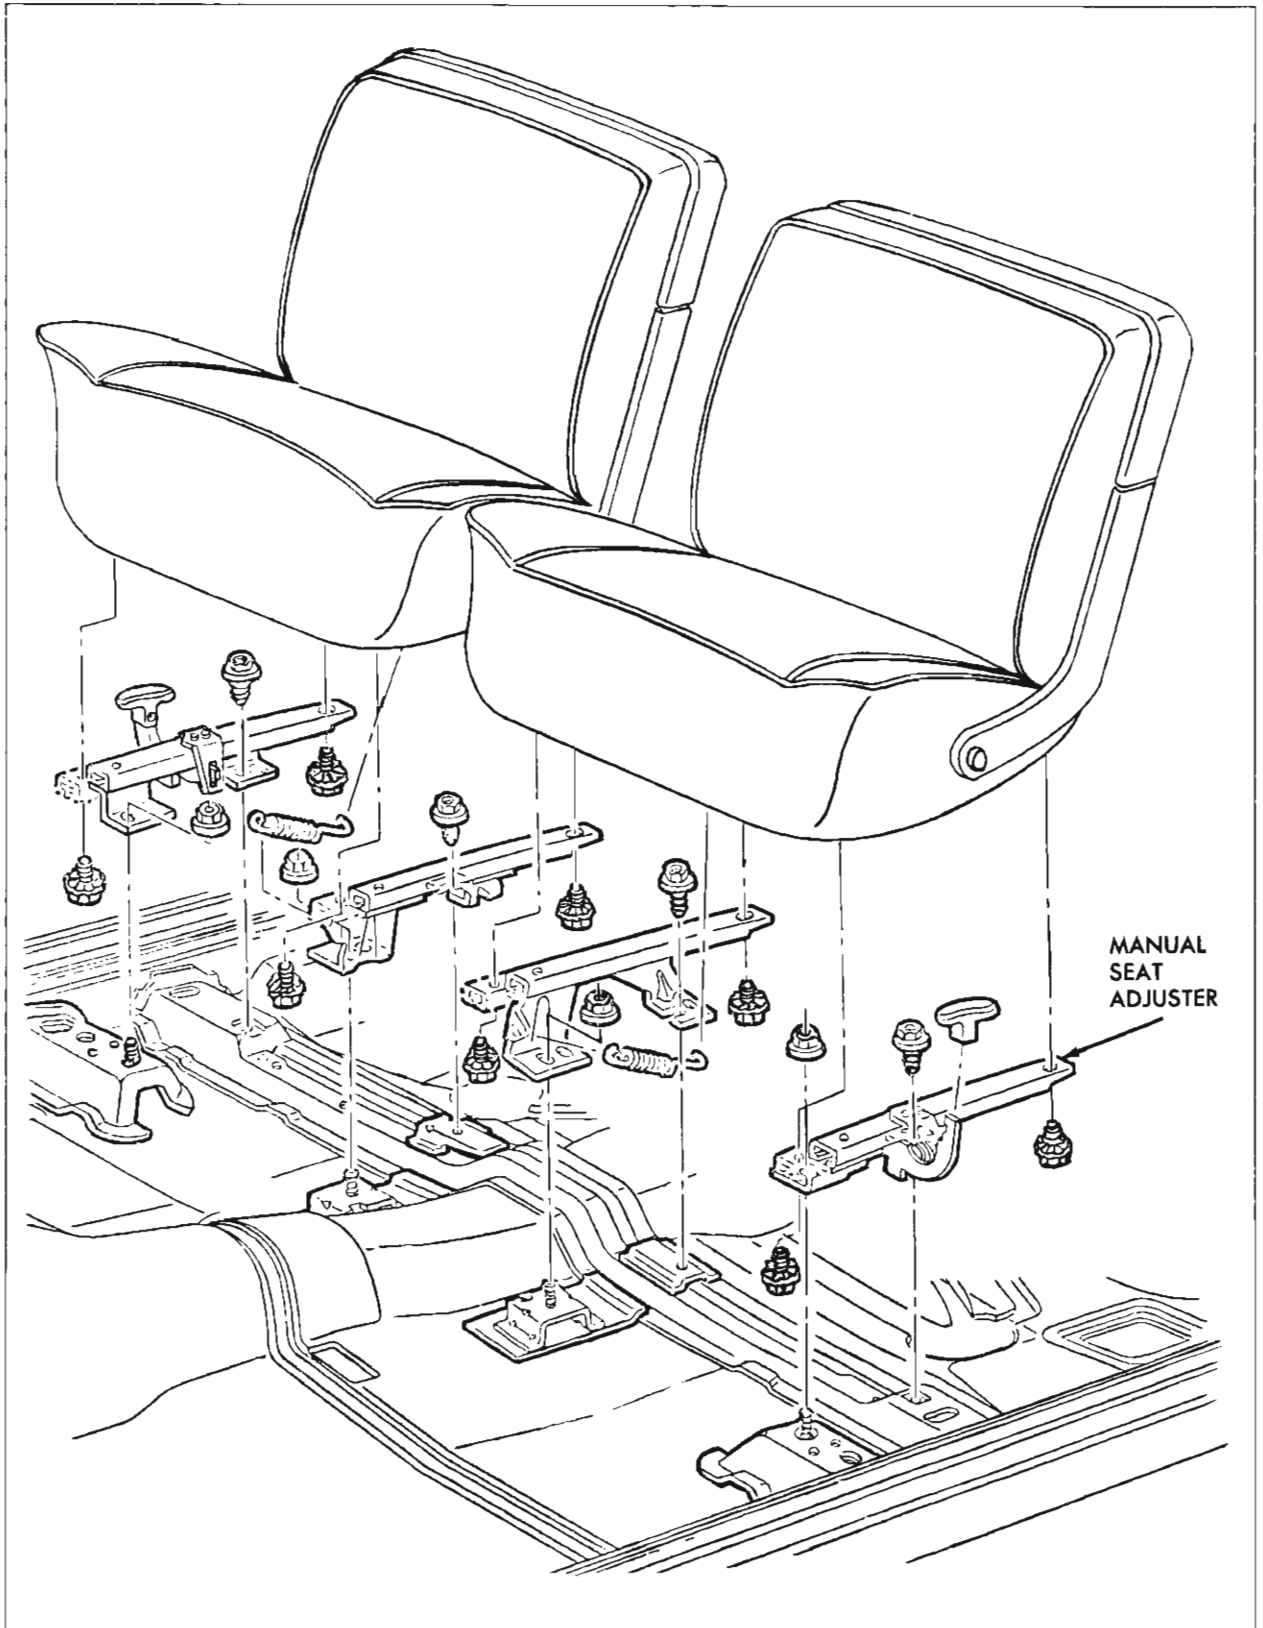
Bucket Seat Assemblies—Typical 2117 and 2267 Style
